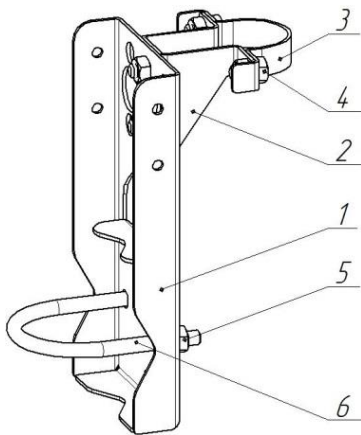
Stainless horizontal bracket. Mounting kit type 1
